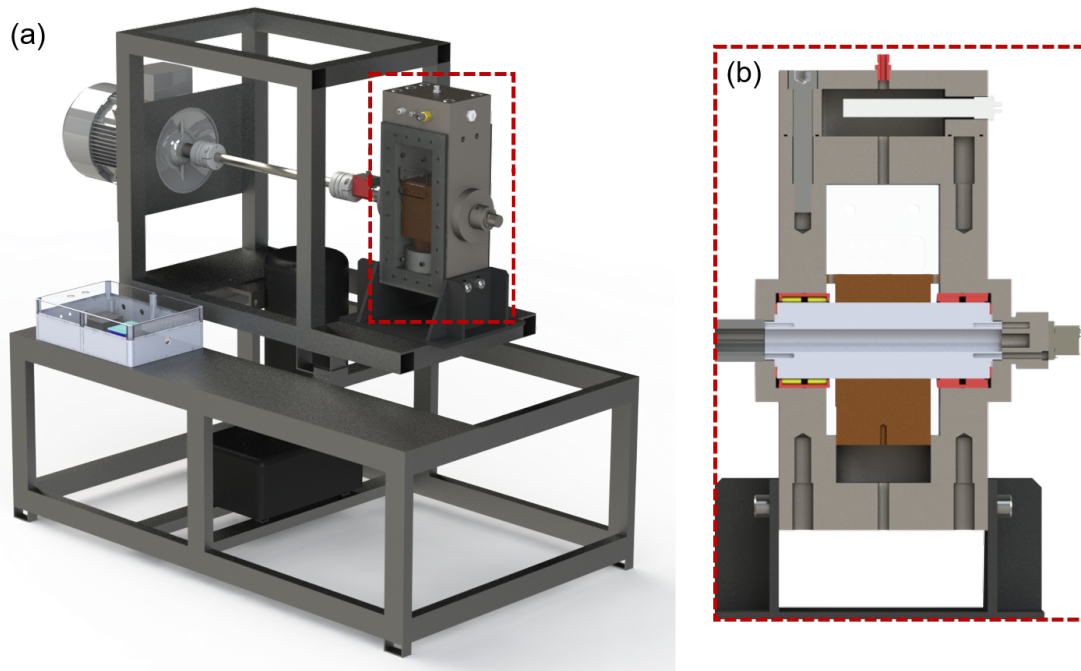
CAD render of BETTY test platform. a) Dimetric projection of full assembly. b) Section view of bearing housing. Cabling and hydraulic hose circuit omitted for clarity.
